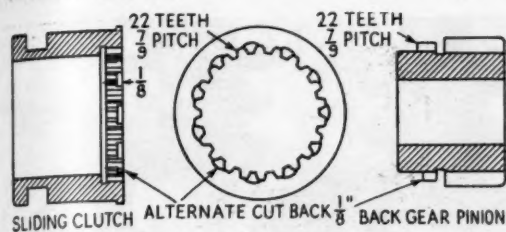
Positive clutch comprising a spur gear and an internal gear
